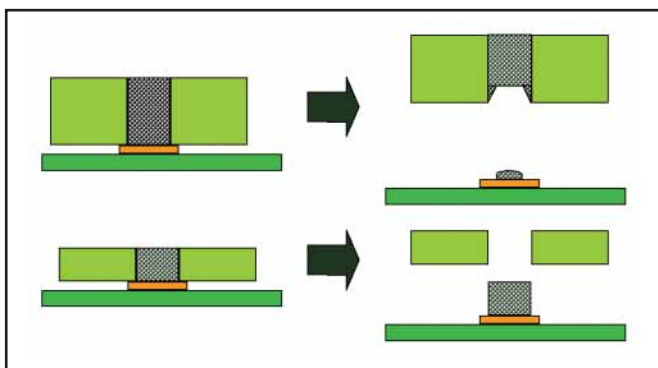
shows a stencil that complies to the Area Ratio Rule resulting in the majority of the solder paste being printed on the printed circuit board pad. (courtesy of Bob Willis)
